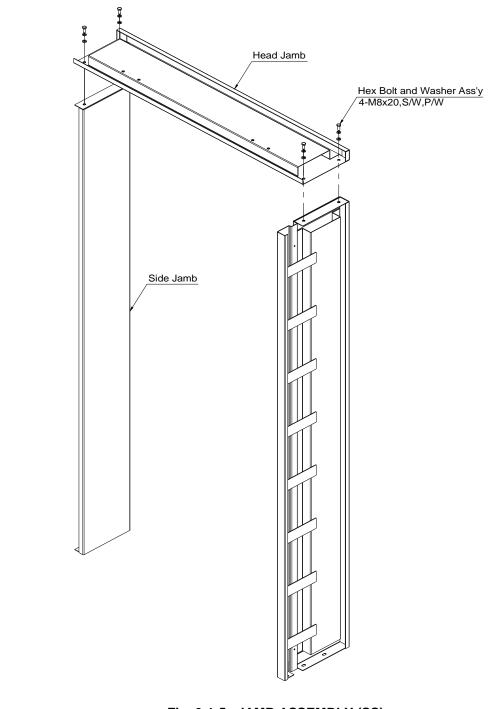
JAMB ASSEMBLY (SS)
